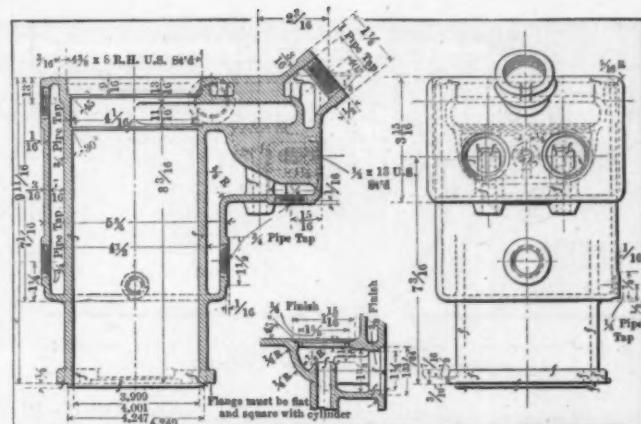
Cylinder of gray iron, with screwed in head, bevel seat to make it tight, and valves at one side
